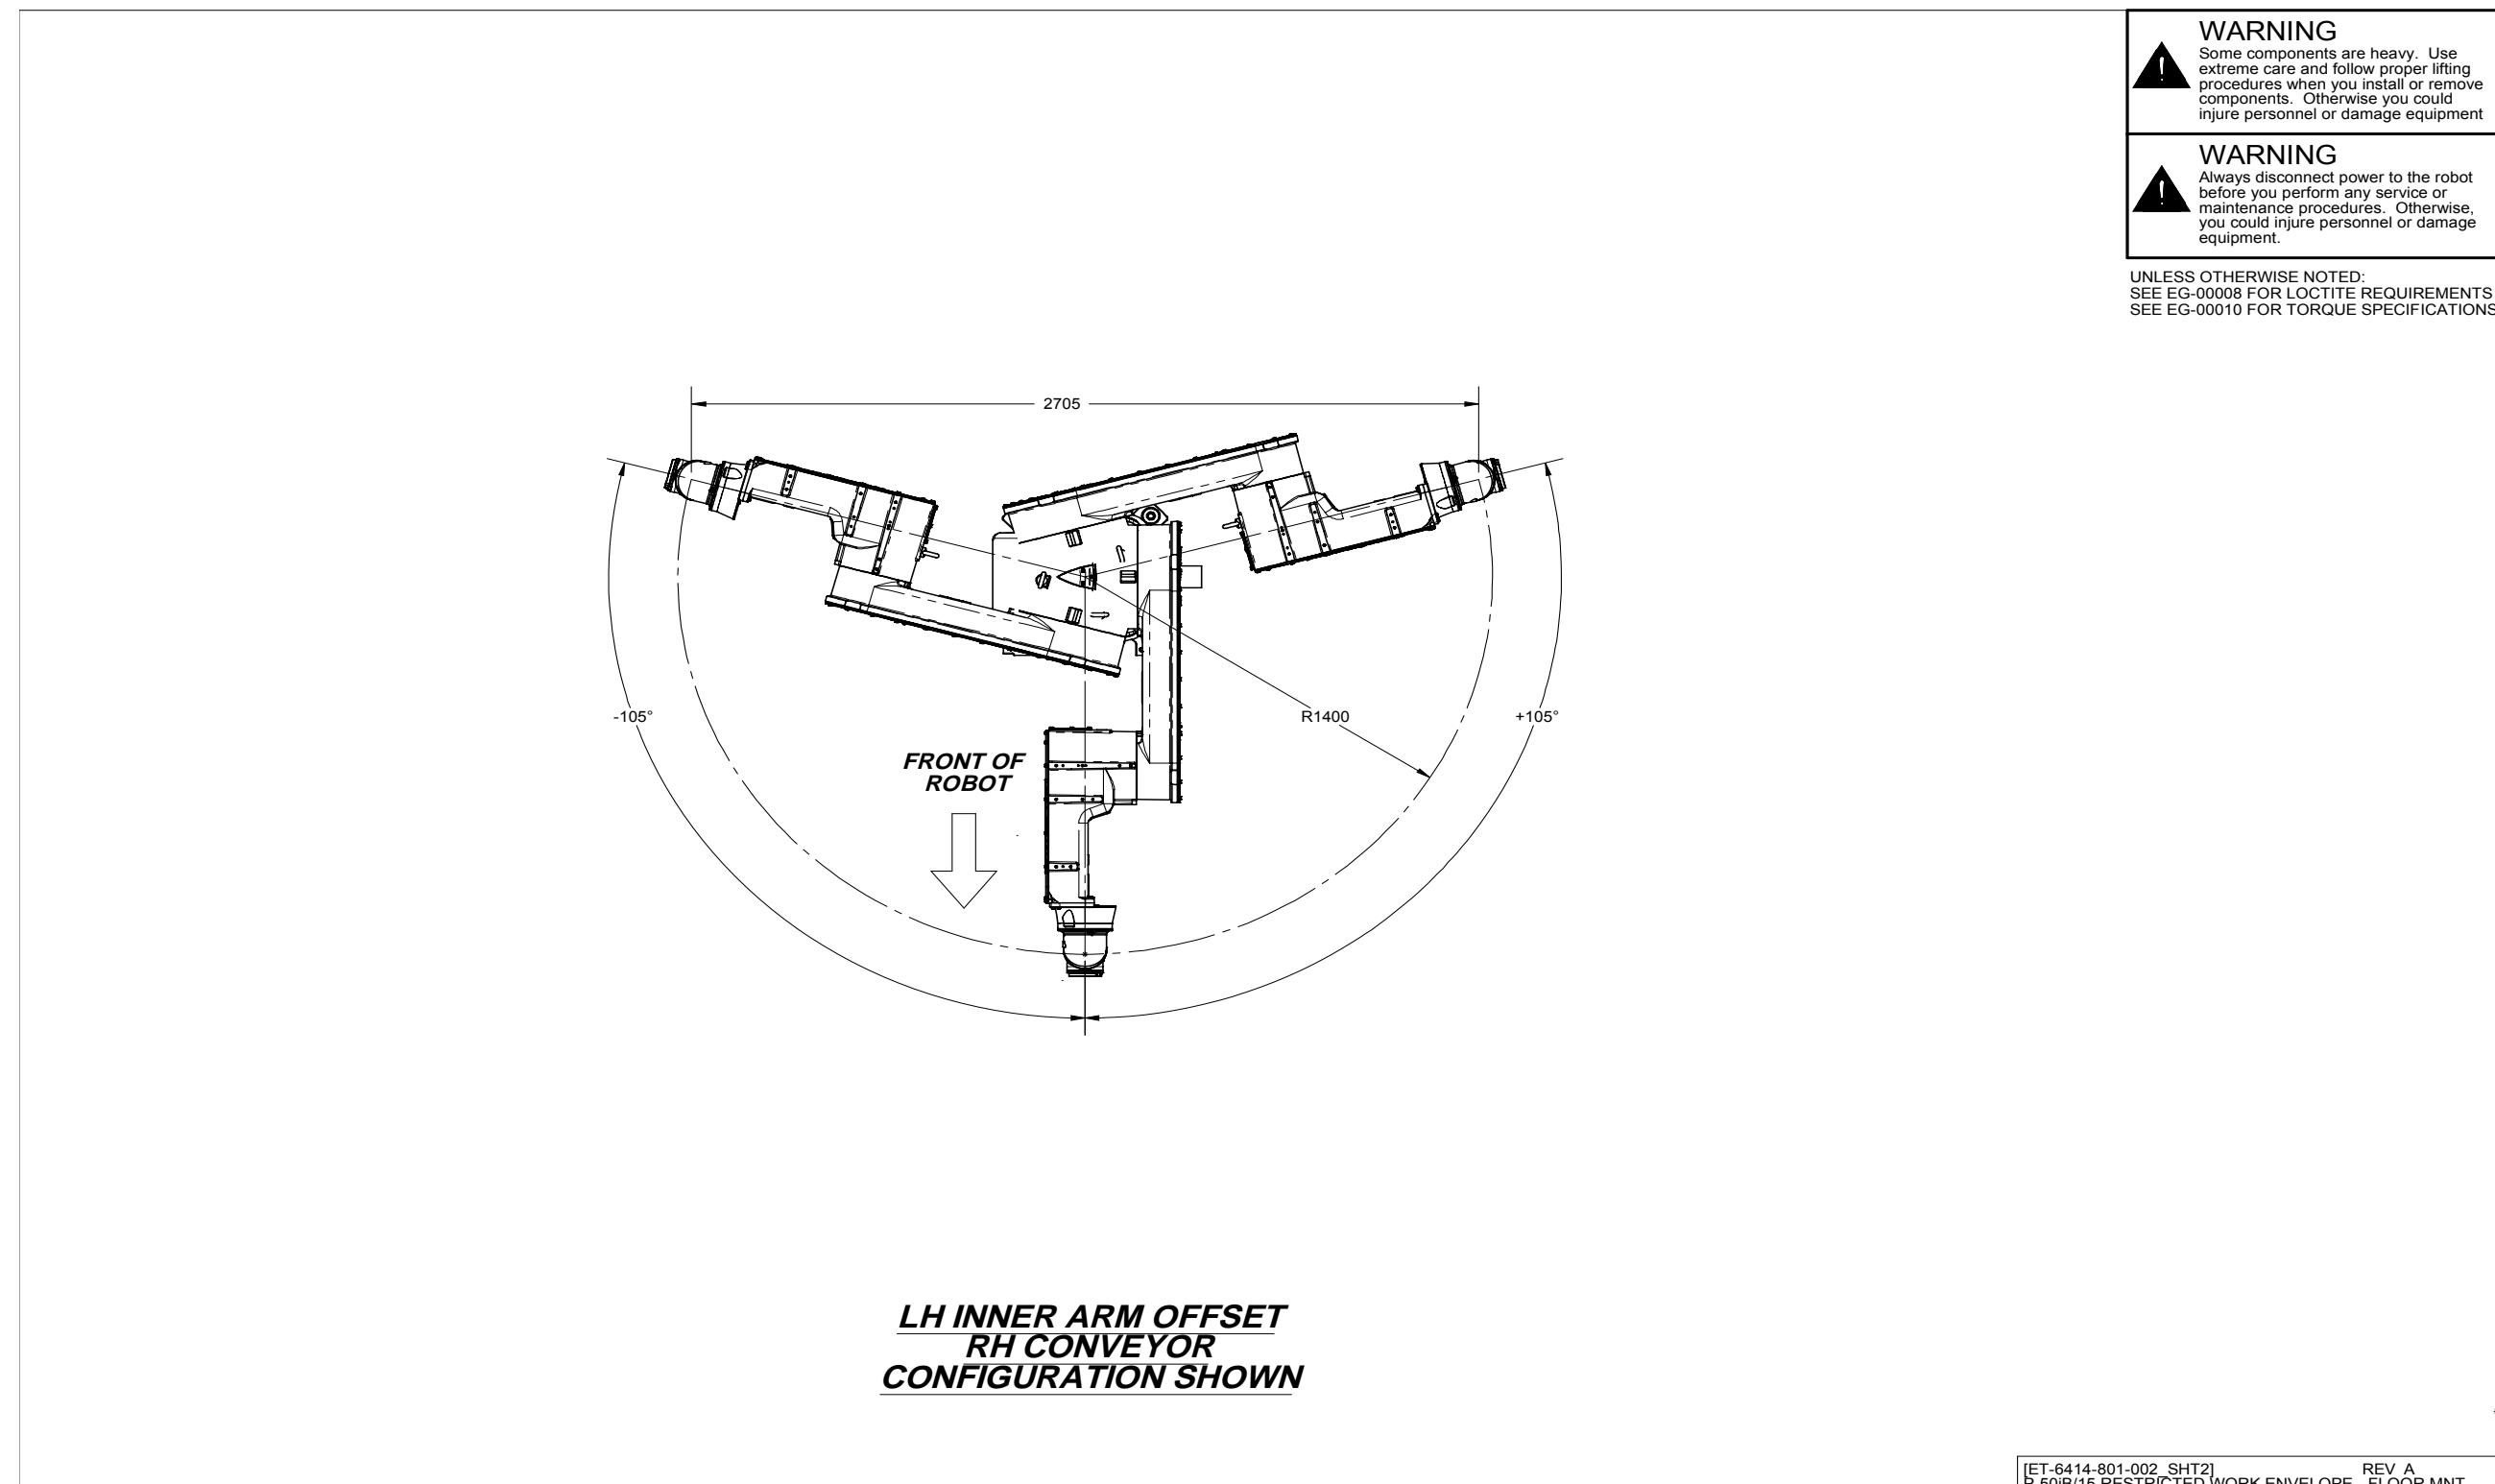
ET-6414-801-002 SHT2, P-50iB/15 RESTRICTED WORK ENVELOPE - FLOOR MNT
